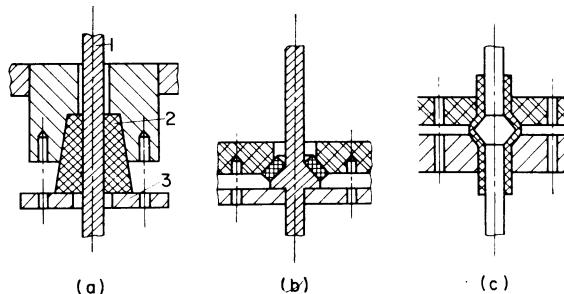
Lead-through, sealed by conical seals: (a) with rubber stopper (after D'Eustachio^{276a}); (b) with flat rubber gasket compressed to conical; (c) with rubber tubing, slipped over the lead-through
